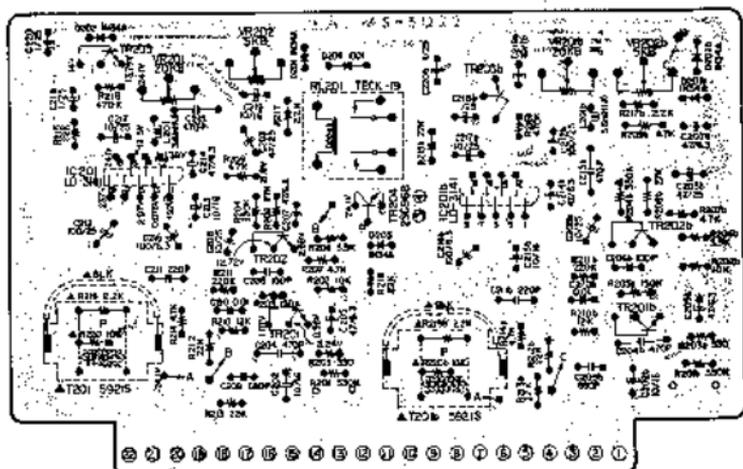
P.B. AMP. P.C. BOARD MS-5022 (Reverse Side)
